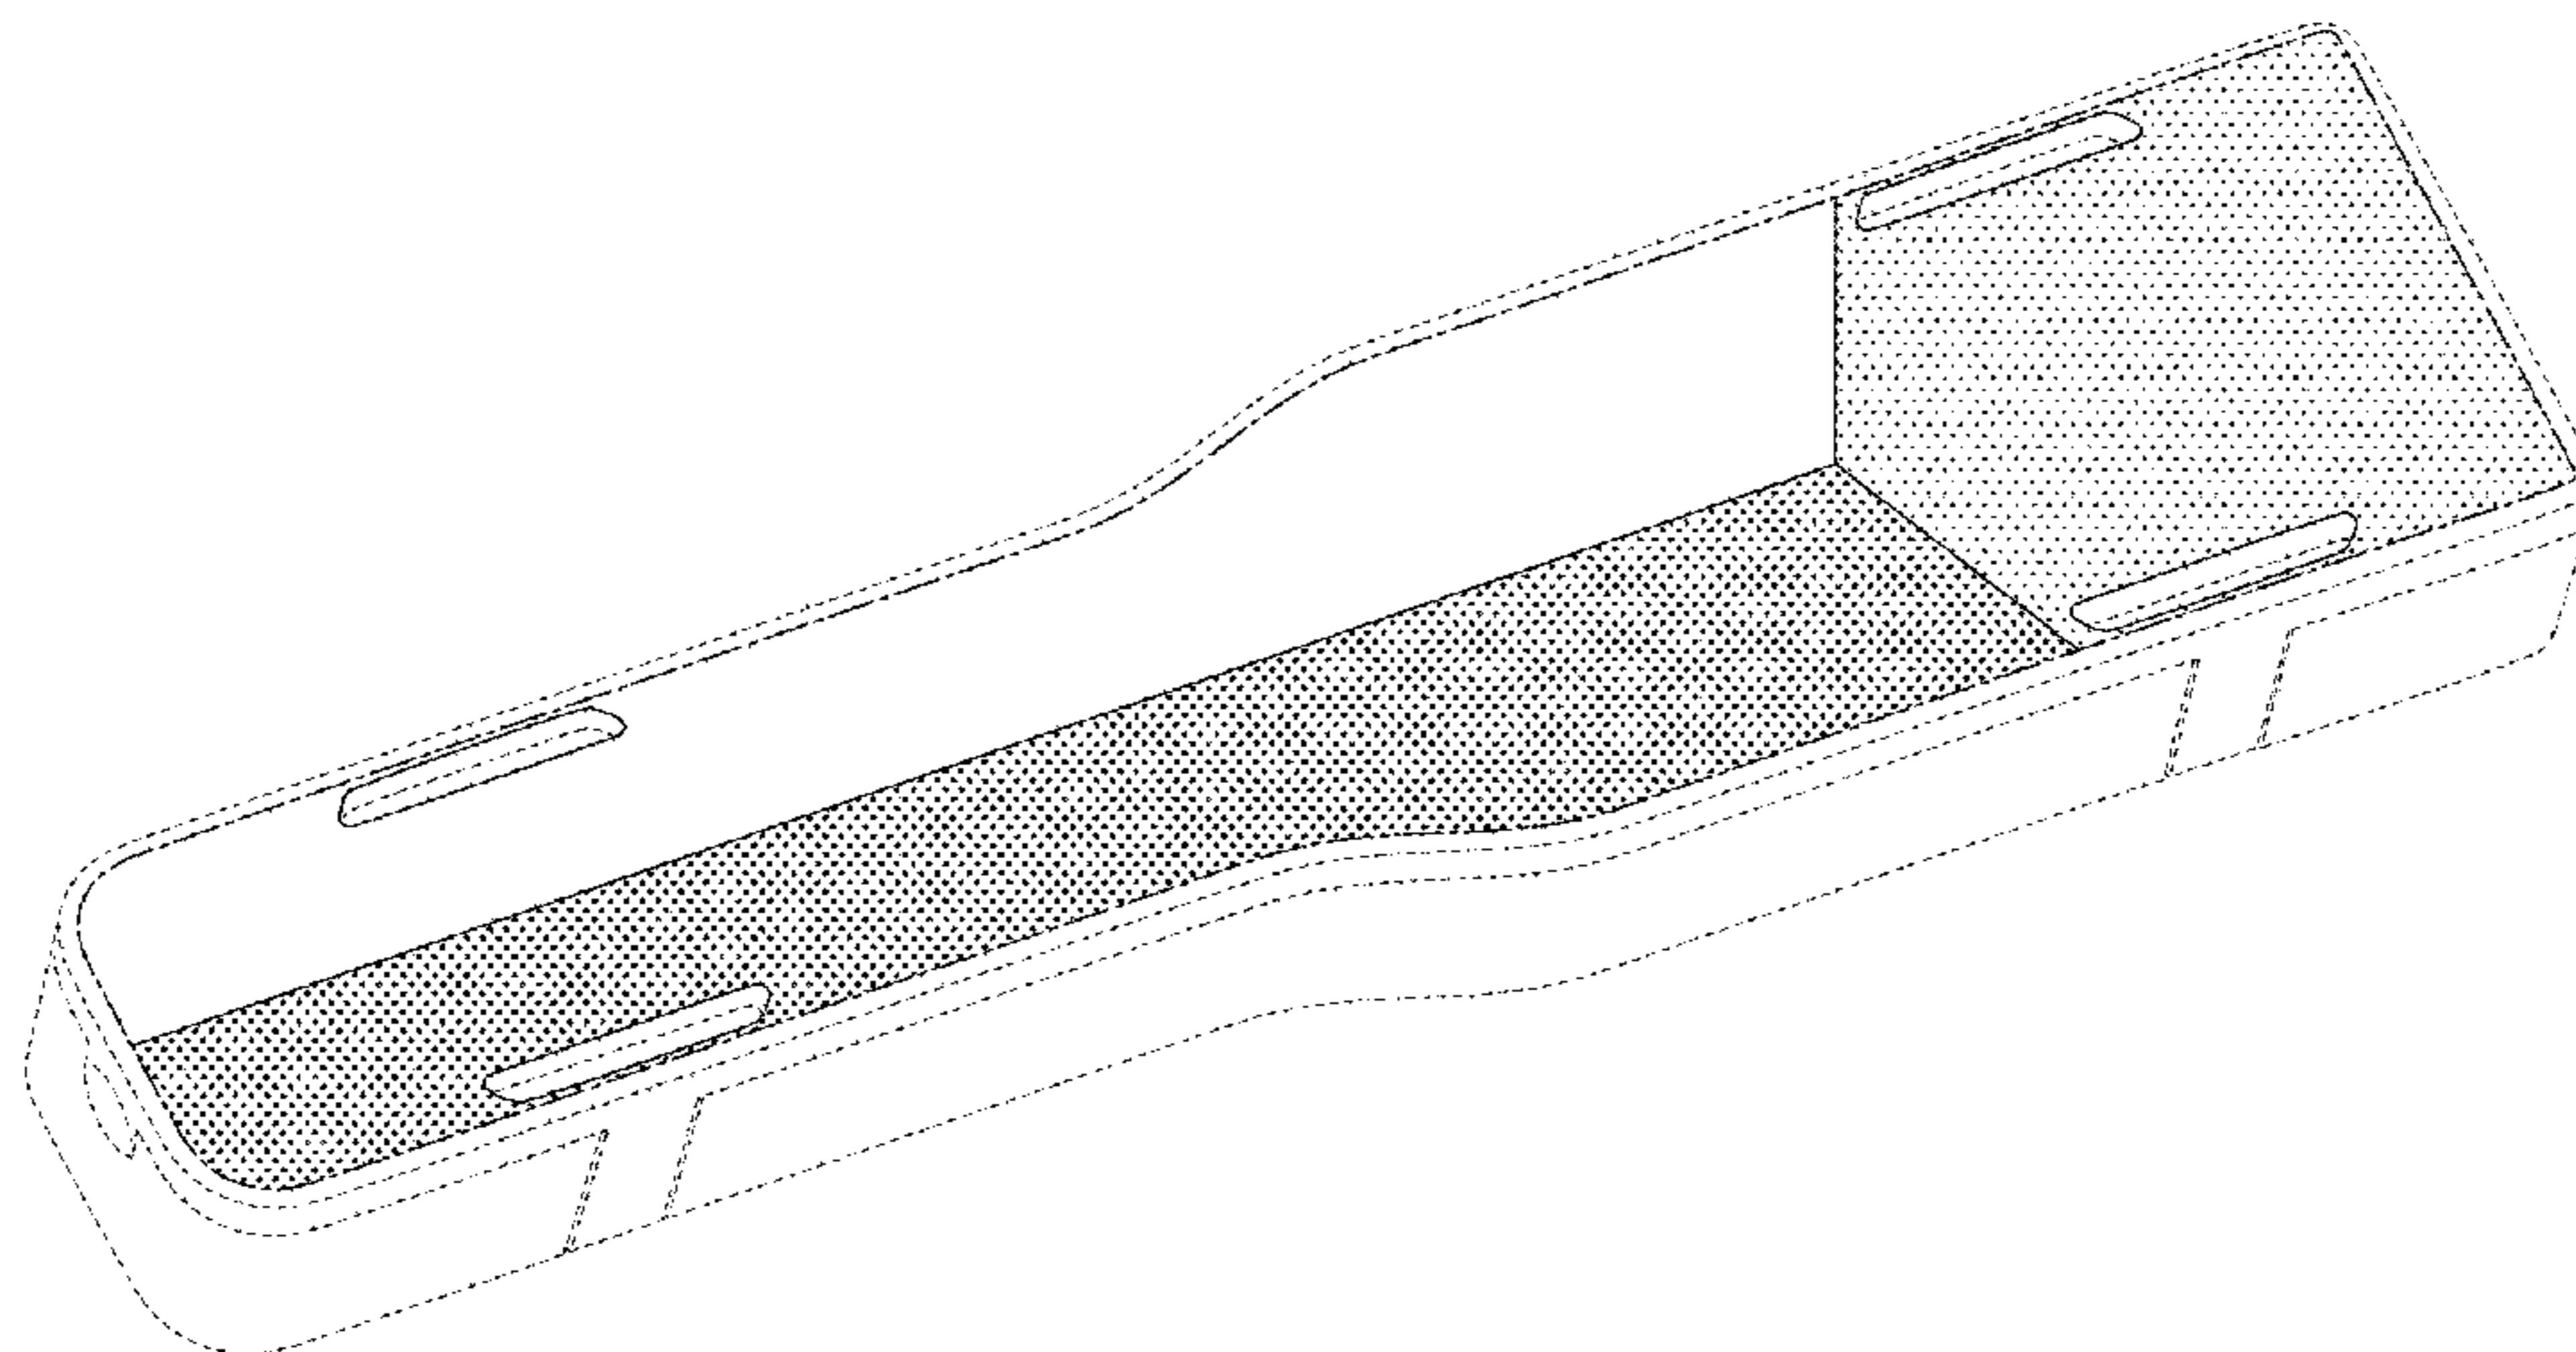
is a front perspective view of a first embodiment of a fiber optic fanout kit showing our new design; FIG. 2 is a top view thereof; FIG. 3 is a bottom view thereof; FIG. 4 is a front view thereof; FIG. 5 is a rear view thereof; FIG. 6 is a right view thereof; and FIG. 7 is a left view thereof.
